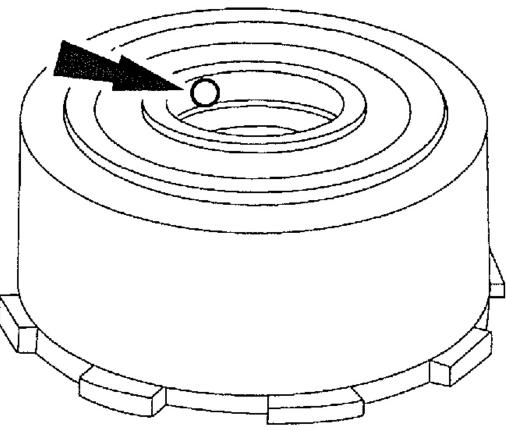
Installing Direct Clutch Pressure Plate & Retaining Ring
